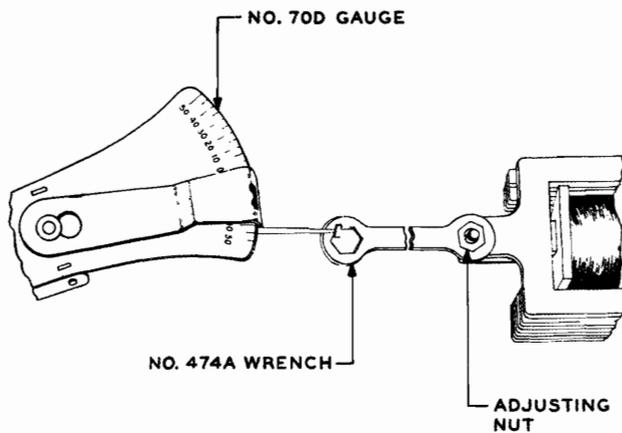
Method of Checking Tightness of Adjusting Nut
